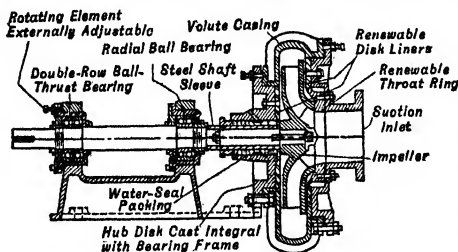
Centrifugal sand or slime pump (Morris Machine Works).
